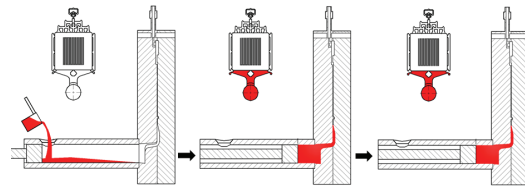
Vacuum die casting process for manufacturing bipolar plate.
